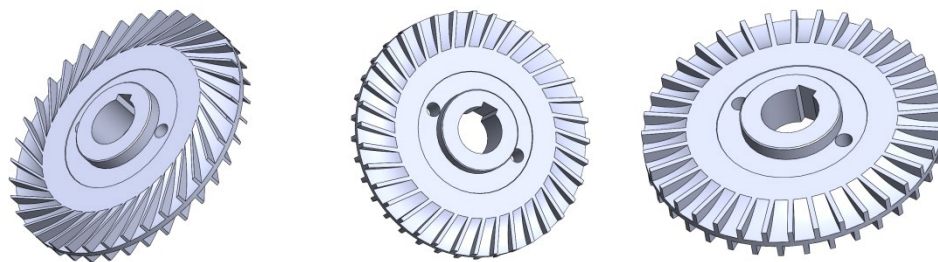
CAD Model of Impellers with 40°, 70° and 90° Blade Exit Angle
